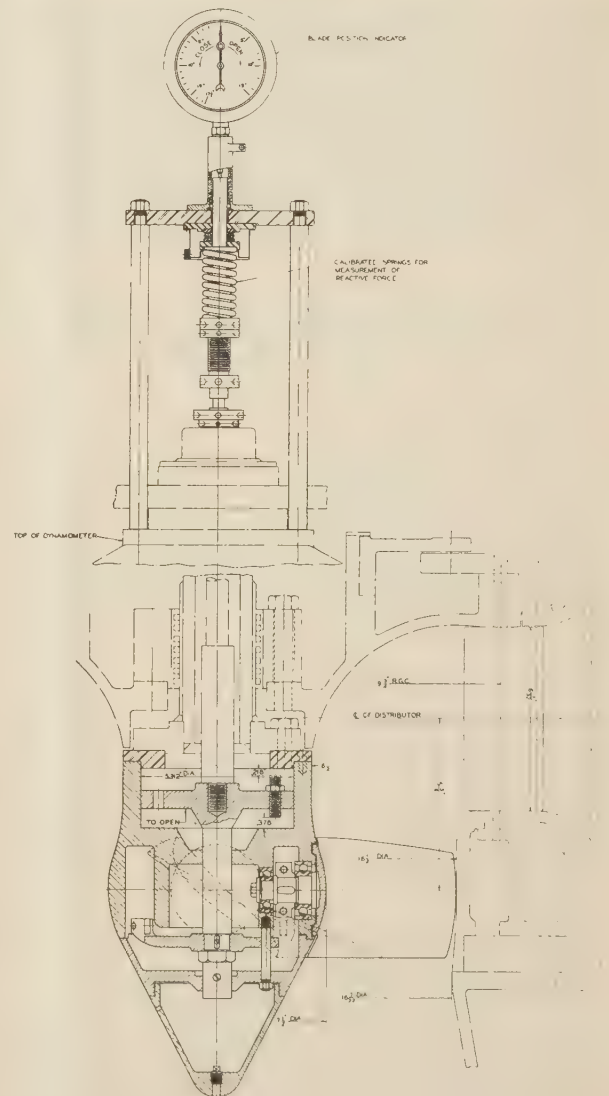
SECTIONAL VIEW OF 16 1/2-IN. TEST MODEL
